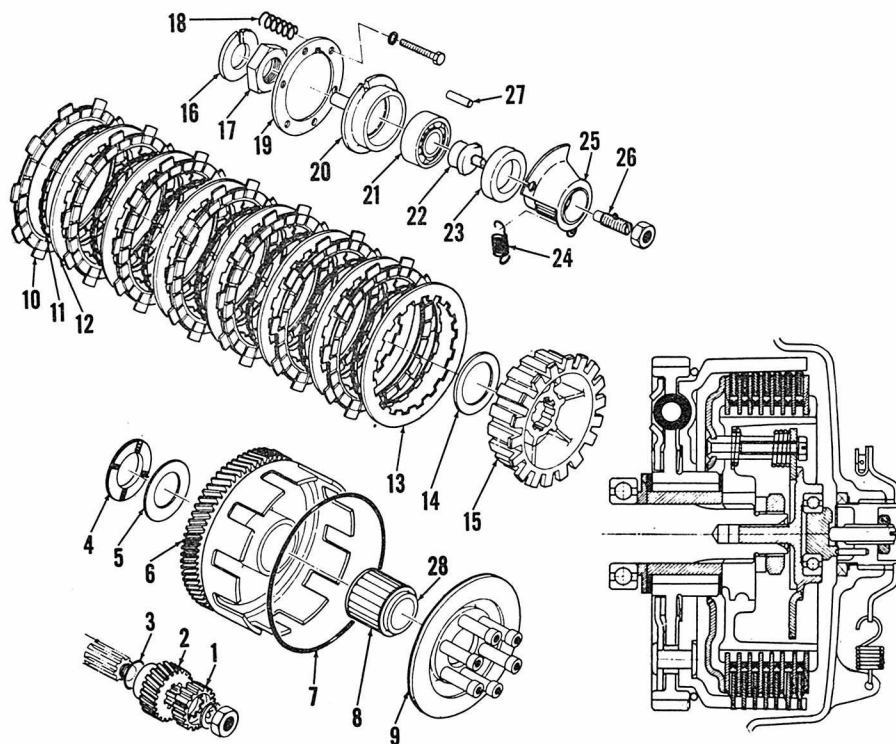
Exploded view of the clutch assembly. Unit is mounted on right end of transmission input shaft and is driven by the crankshaft primary drive gear (2).
